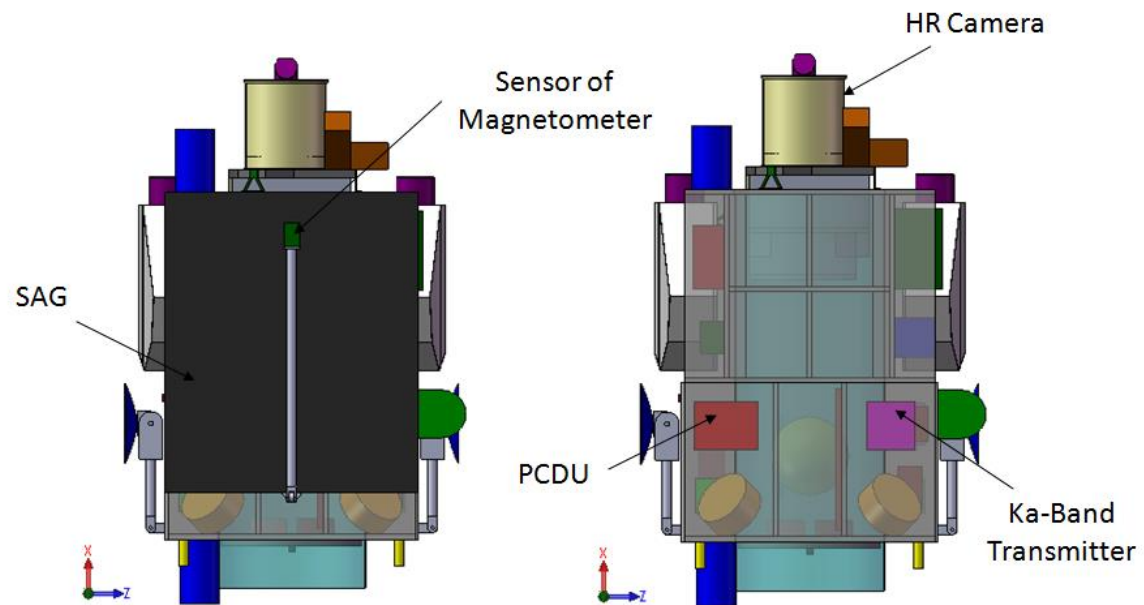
Y+ side view of GSST satellite, showing equipment layout for OPC3-2.
